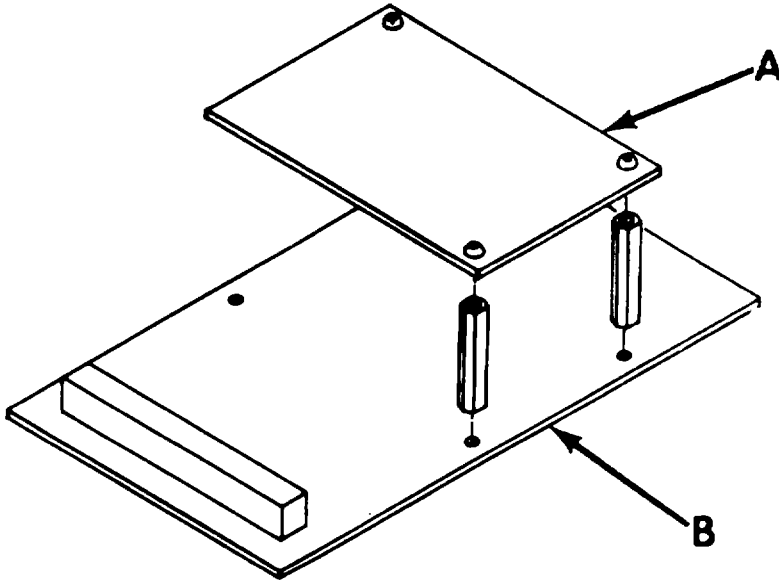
Circuit Board Assembly (Sheet 1 of 2)
